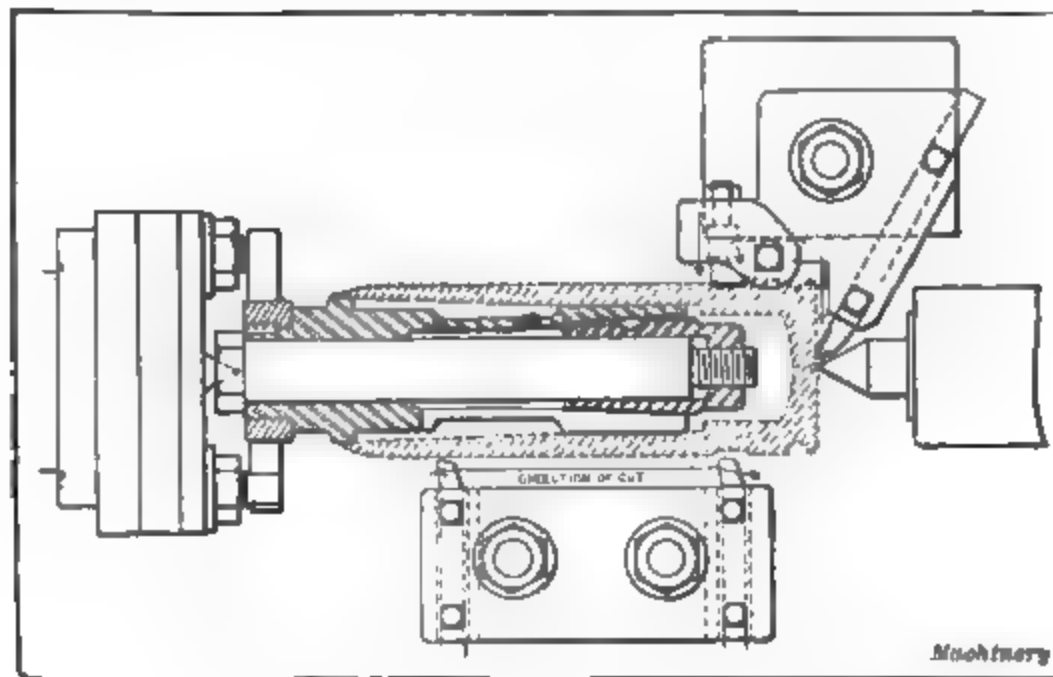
Combination Threaded and Expanding Arbor for holding Shrapnel Shell in Lathe
